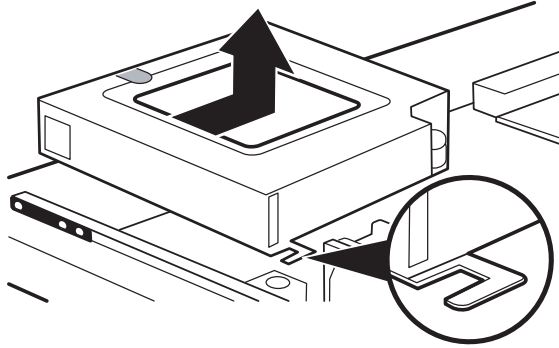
Removing the DVD Assembly From the Chassis
